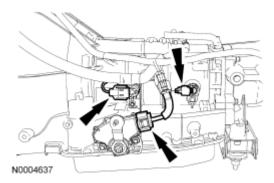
Output Shaft Speed Sensor, Transmission Range Sensor & Turbine Shaft Speed Sensor Electrical Connectors
